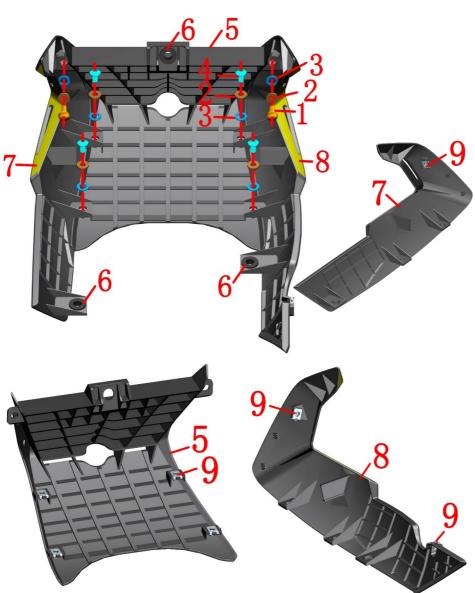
LOWER SHROUD		Lower shroud component 2	CHK	Q
